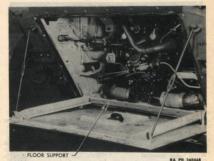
Hull Rear Door Open and Supported by Turnbuckle Hooks 41-H-2742
